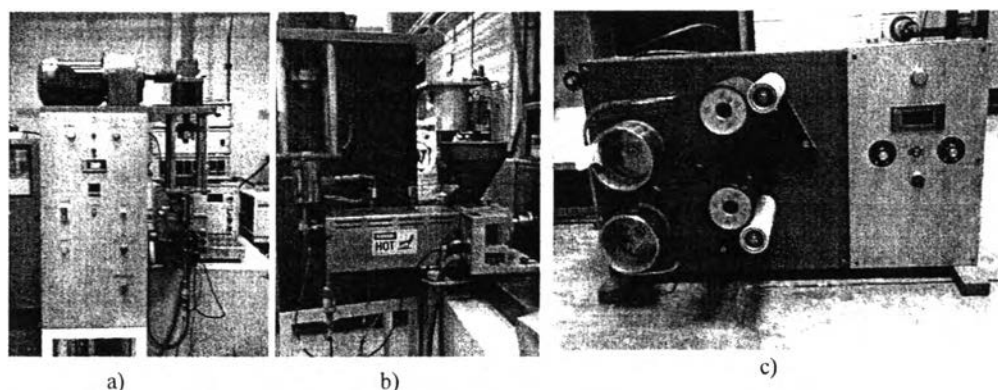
(a) Front view, (b) side view of co-extruder and (c) rotor.
